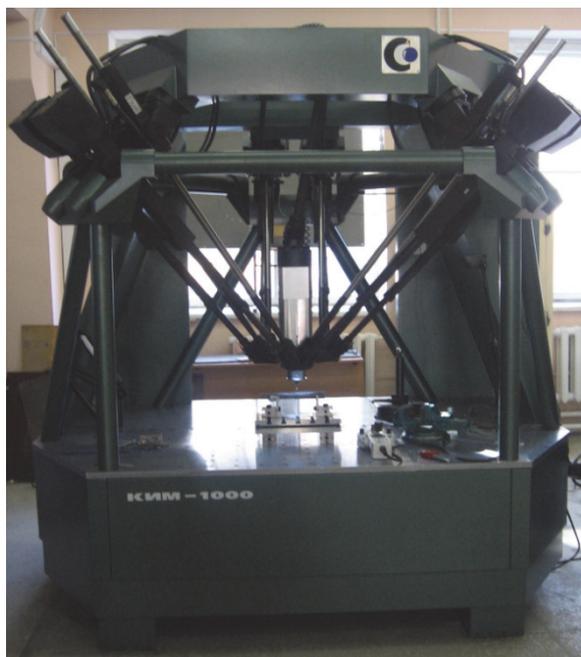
CMM “KIM-1000, Lopic” and points of thread M32×2,5
